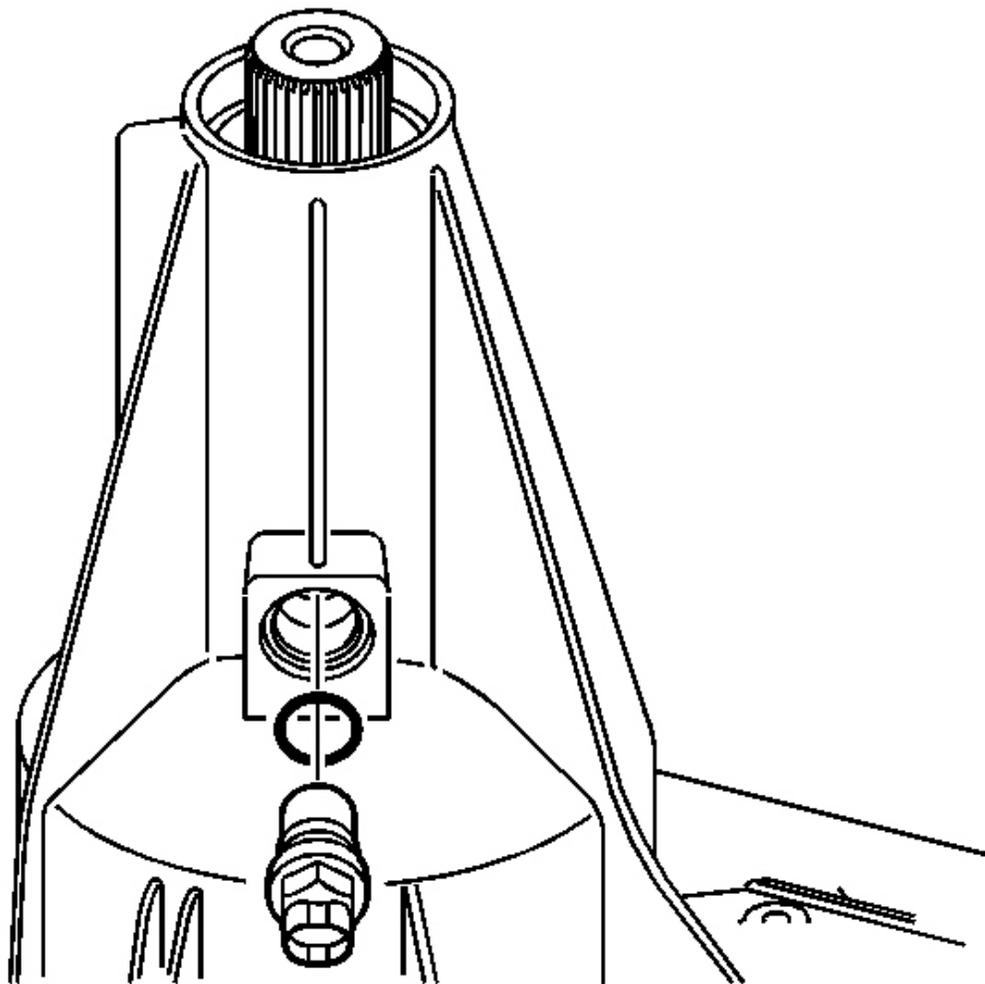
Locating Vehicle Speed Sensor (VSS)
